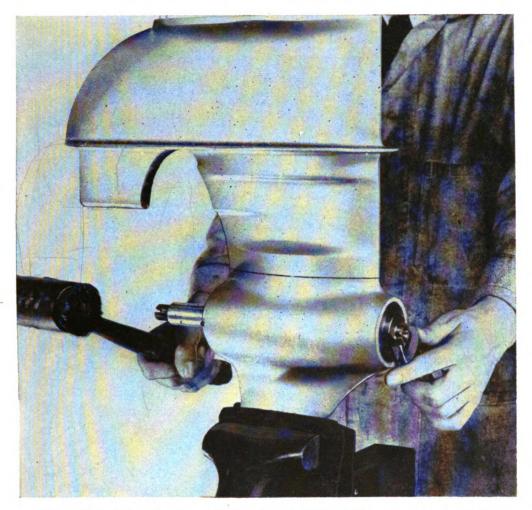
Driving out end of propeller shaft to obtain necessary clearance.
